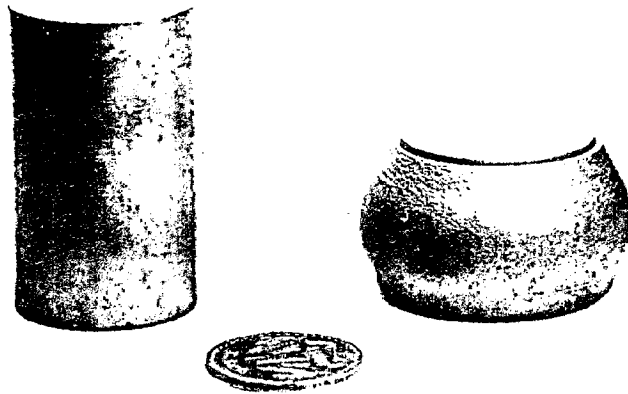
shows the HIPed compact before and after isothermal forging, which produced a deformation of about 50%. The material after forging was found to be completely free from any cracks. Rectangular blanks (8mmx8mmx40mm) transverse to forging direction (i.e. perpendicular to the axis of forged piece) were cut. The bars were heat treated according to the heat treatment T_2 . Specimens with reduced dimensions were machined and tested under different conditions. Table 6.7 presents the tensile and the stress rupture properties of the HIPed + forged + heat treated DMP-3. Examination of these properties shows that the forging has not produced any appreciable improvement in the mechanical properties of the alloy. The microstructural examination of the forged and heat treated alloy showed the occasional presence of pores at the triple point boundaries (Fig.6.20), suggesting that either the deformation of 50% is not adequate to close the pores present in the HIPed compact or the 1448 K HIPed material by virtue of the presence of pores is not suitable for forging. Shortage of
